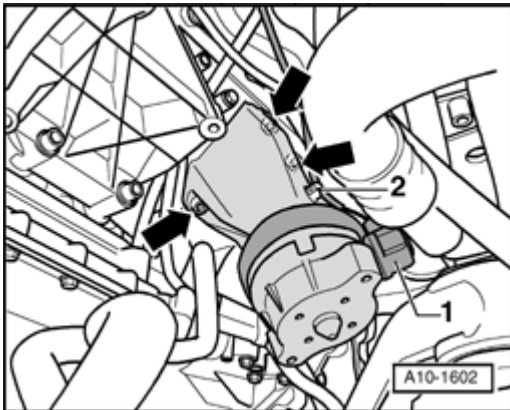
Identifying Engine Mount Electrical Connector, Electrical Wire & Engine Mount
